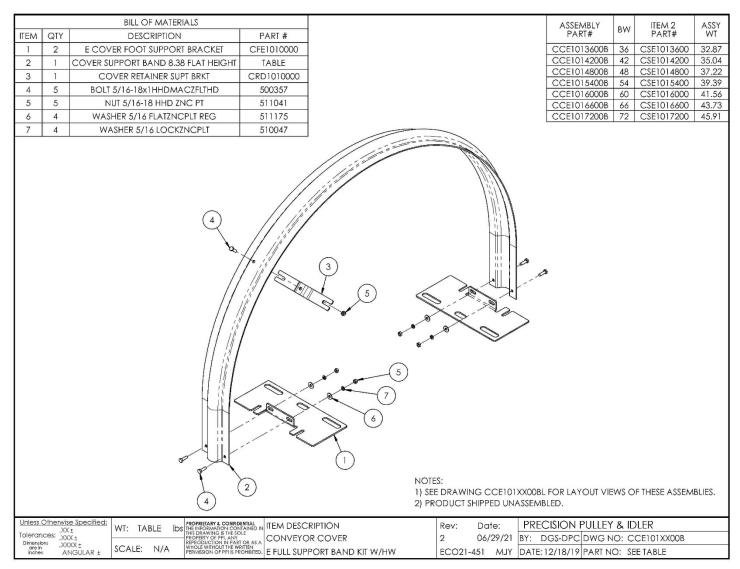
E FULL COVER SUPPORT BAND ASSEMBLY WITH LIST OF COMPONENTS
